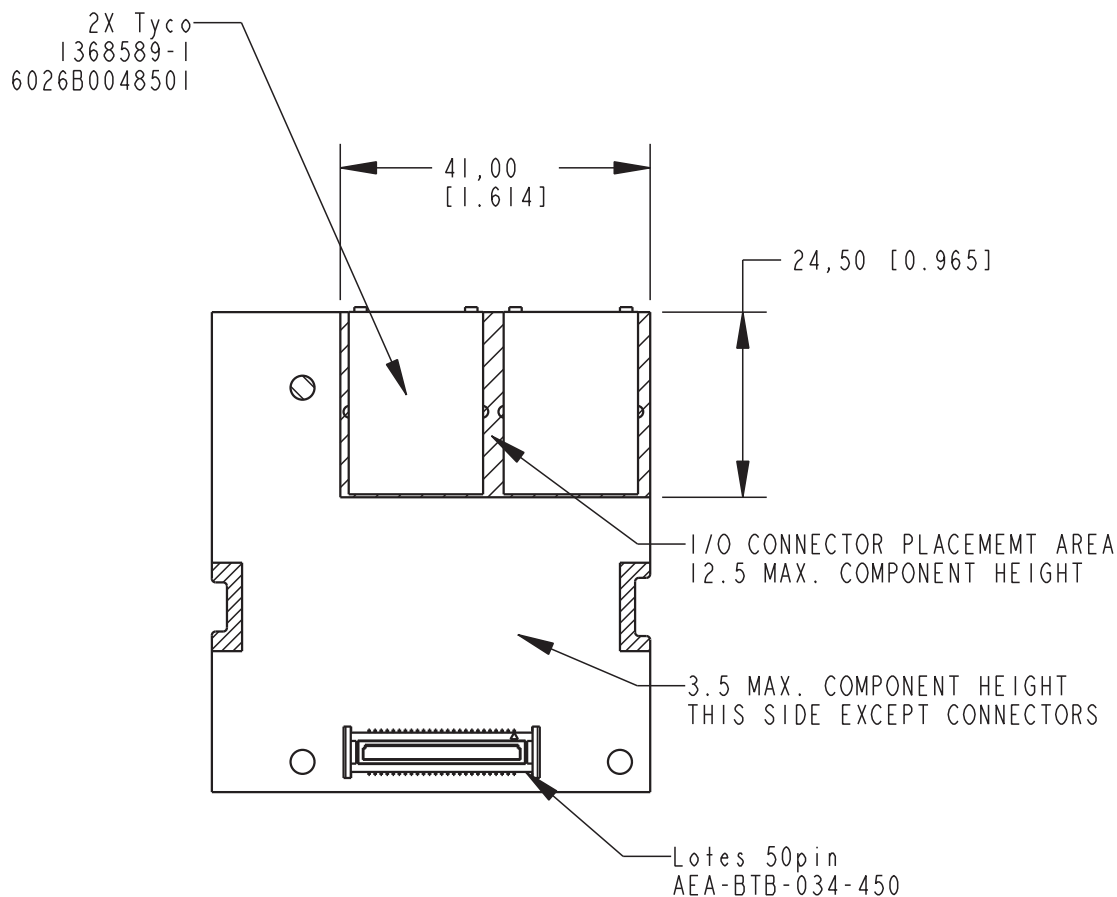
Dual Gb Ethernet I/O Module Dimensions; Bottom View
